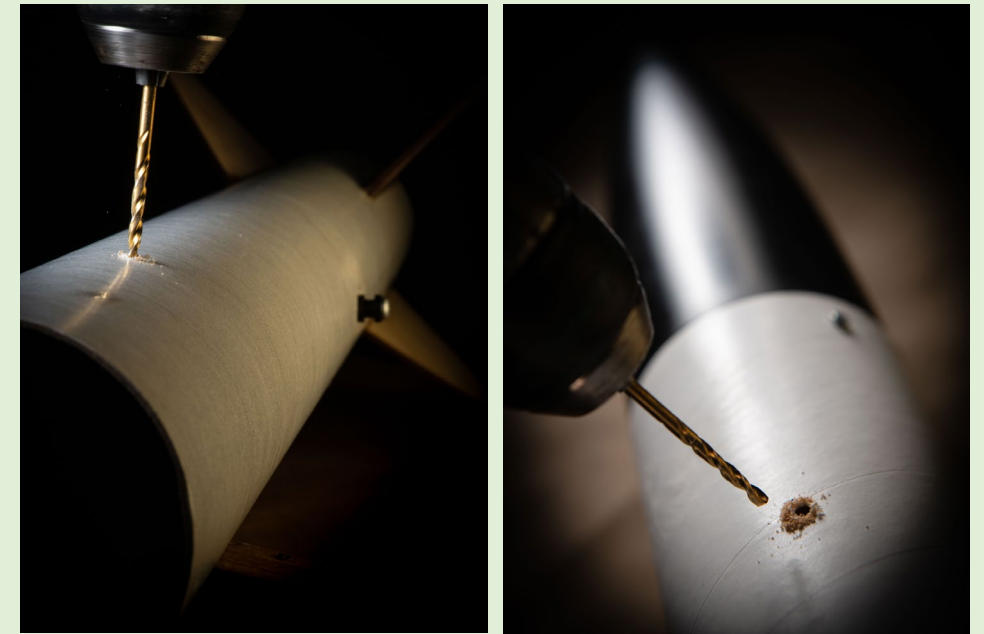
Drilling Vent Hole in Booster Section to Not Interfere with Rail Buttons Alignment (Left); Drilling Vent Hole in Sustainer Section (Right)
